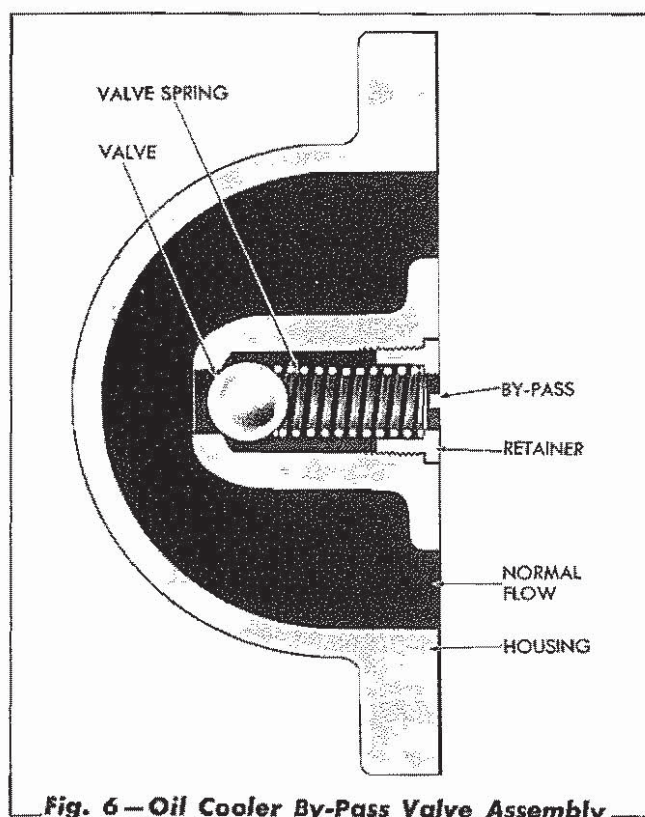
Oil Cooler By-Pass Valve Assembly
